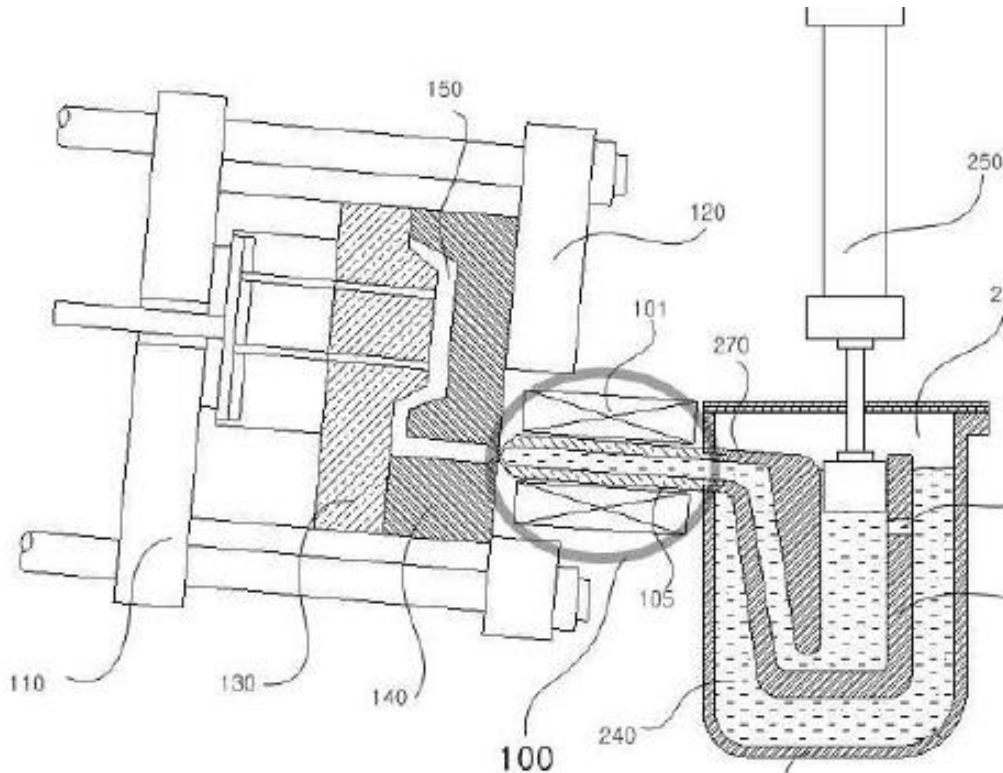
Hot chamber rheo-diecasting machine. The circle indicates de magnetic field around the nozzle [62].
